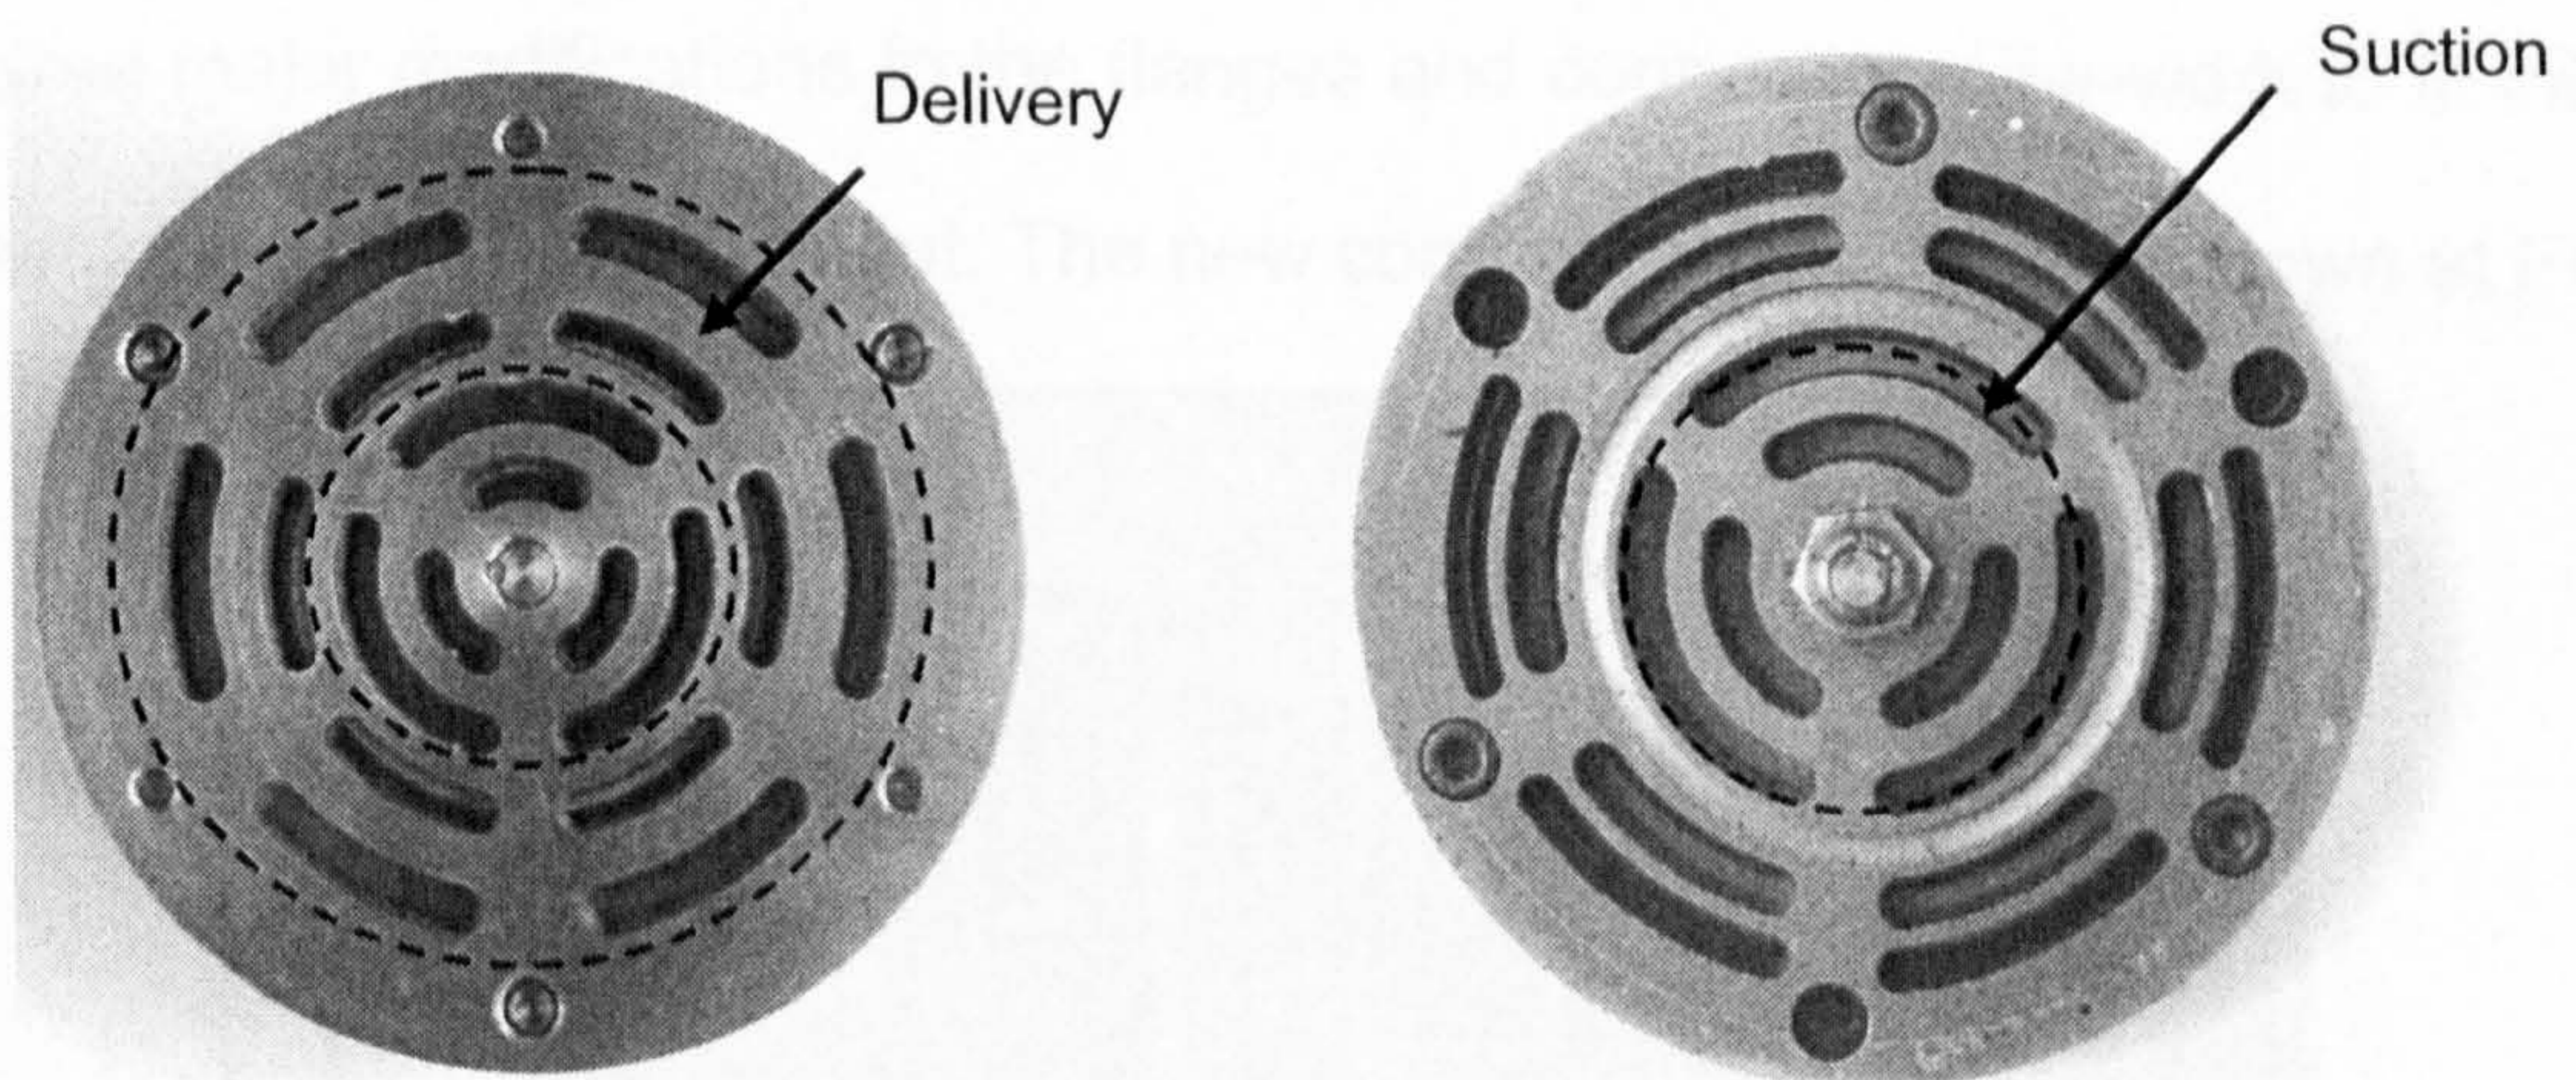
Combined Compressor Inlet and Discharge Plate Valves
